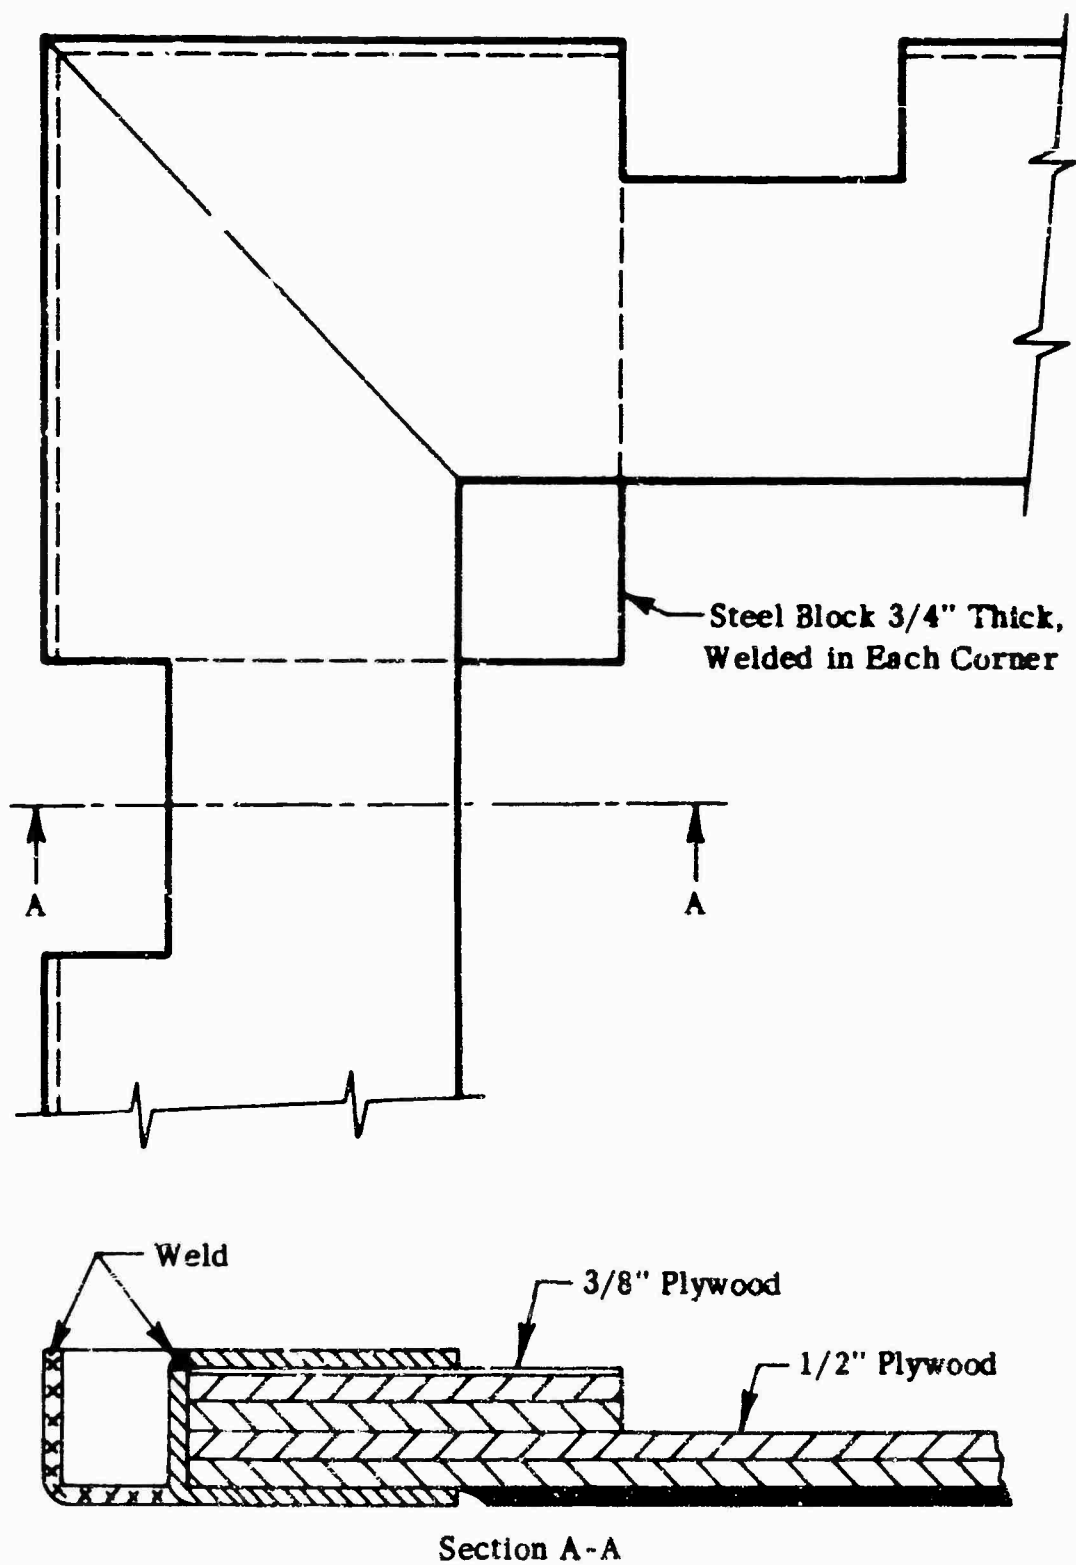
CORNER CONSTRUCTION AND SECTIONAL VIEW OF STEEL FRAME AROUND THE BOTTOM DECK
